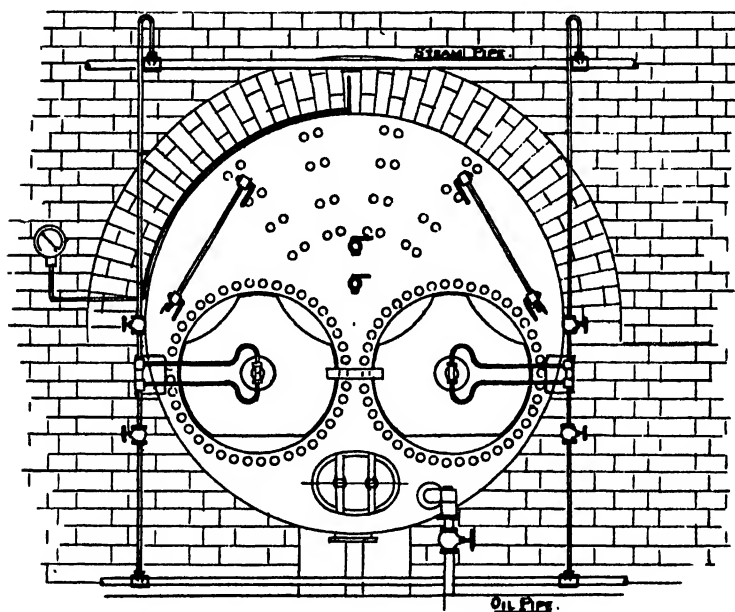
ARRANGEMENT OF LANCASHIRE BOILER FOR LIQUID FUEL WITH STEAM BURNERS.
